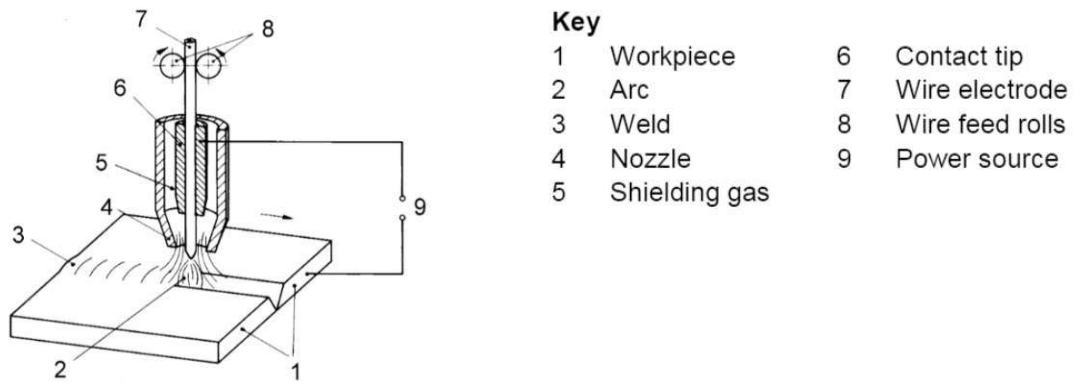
Schematic overview of gas metal arc welding [34].
